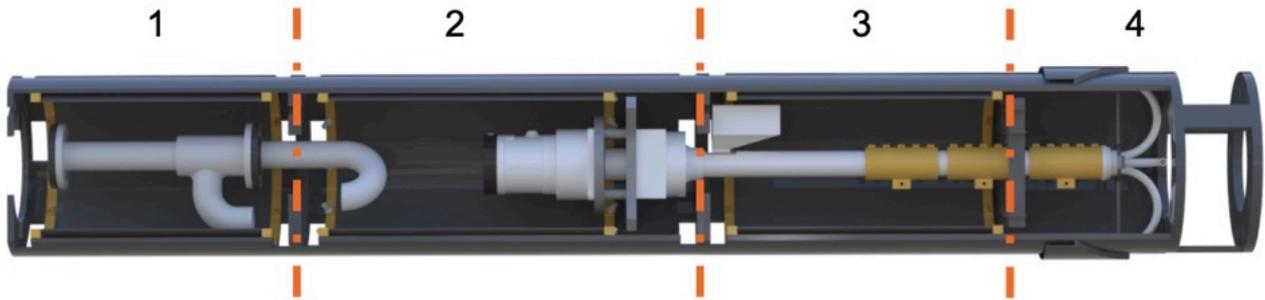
Swissloop Tunnelings Tunnel Lining System (cross-sectional view)
